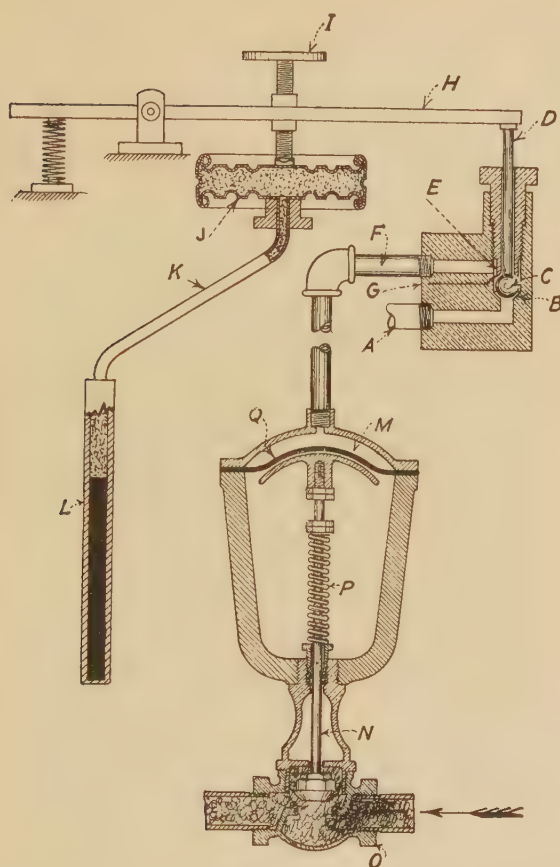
Section of air-operated thermostat and diaphragm motor valve.
